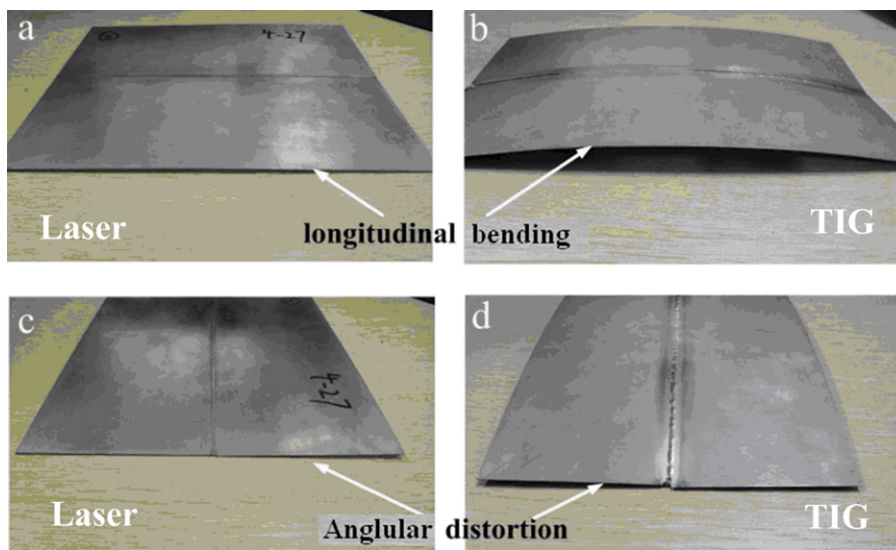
shows the residual distortion in cooled down specimens after LBW and TIG welding. Fig. 6 shows the out-of-plane deformation of specimens after LBW and TIG welding measured by a XJTUOM-II dimensional dense point cloud measuring system. It can be seen from Figs. 5 and 6 that the deformation in the plate welded by TIG welding is significantly greater than that in the plate welded by LBW welding. The deformation in the plates can
